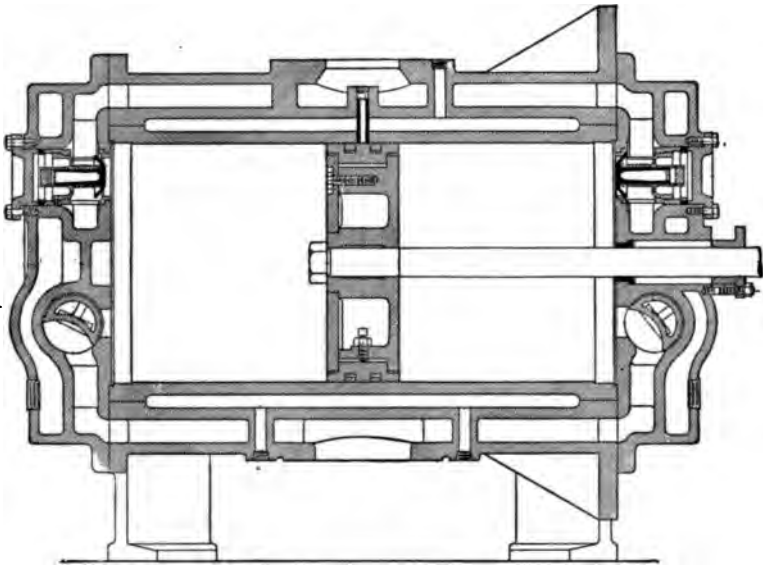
Sullivan Air Cylinder, showing Corliss Inlet Valves.
